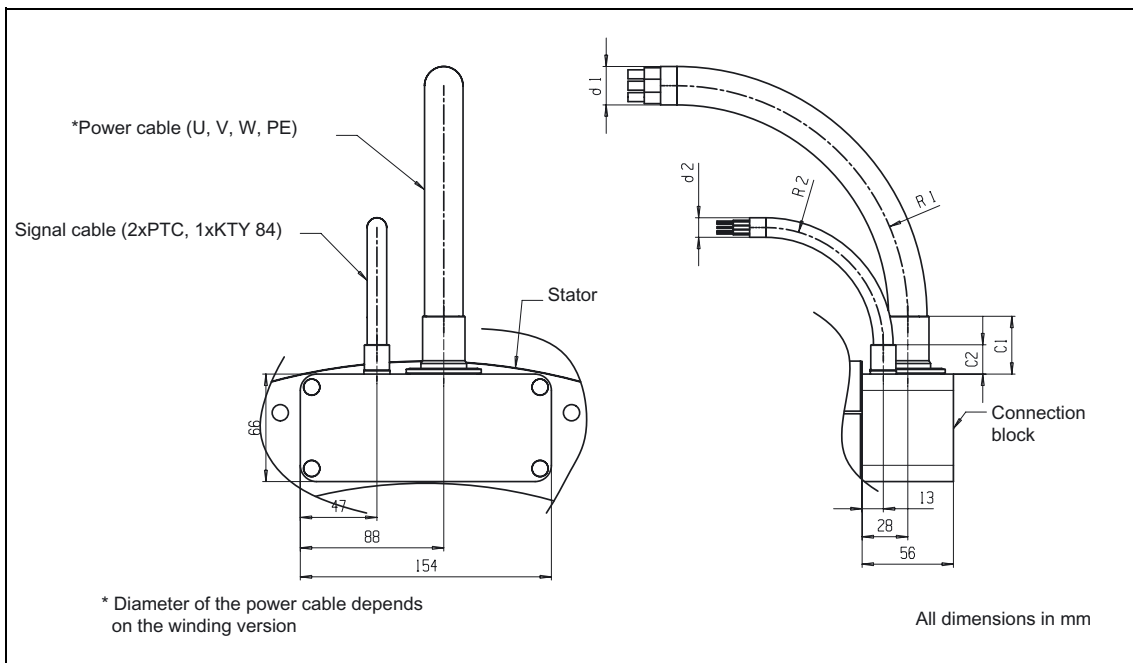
Radial electrical connection with sleeve for 1FW6290 (motor type B)
